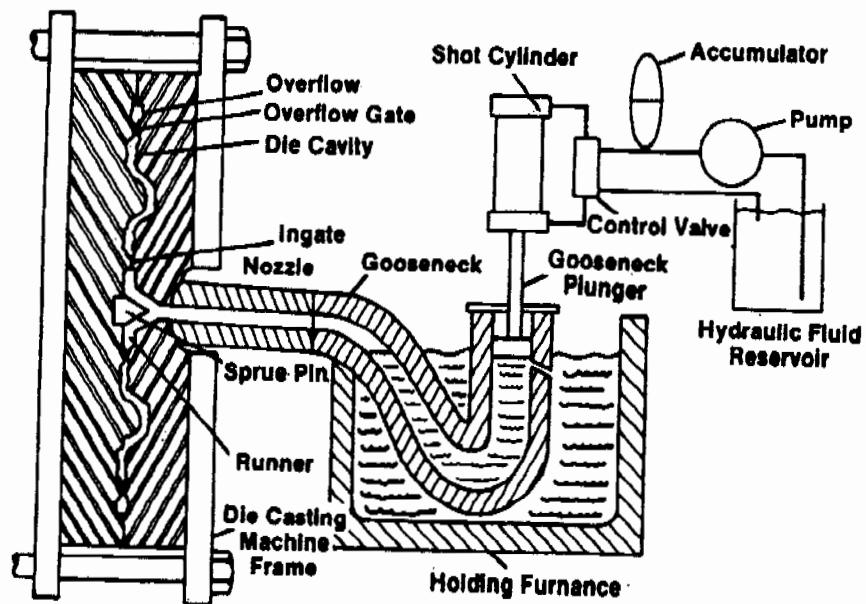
Basic Components of a Typical Hot-chamber Die Casting Machine [15]
